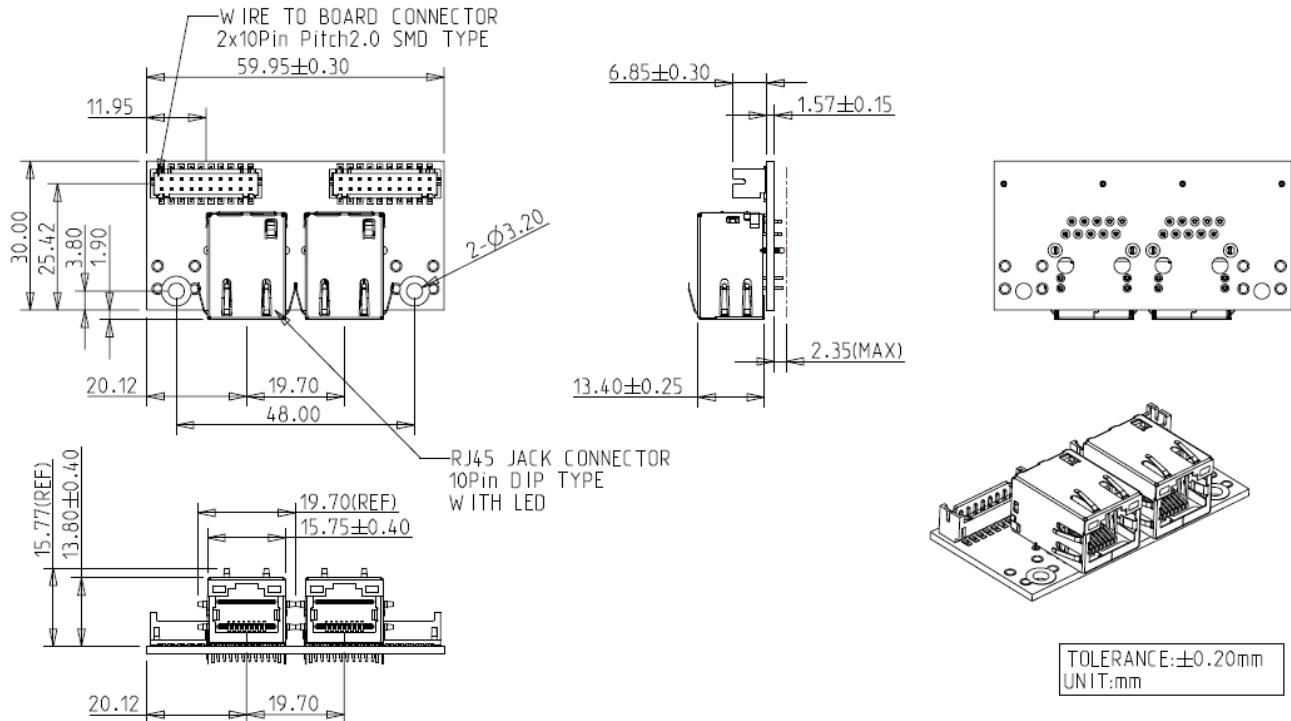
Bracket Daughter Board Drawing (EMPL-22S1-C2/W2)
